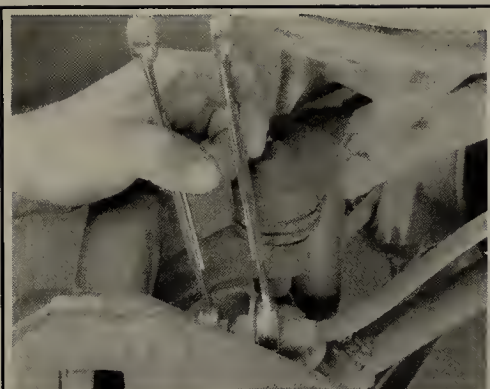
Use two wrenches to loosen the fitting. If available, use flare nut type wrenches
